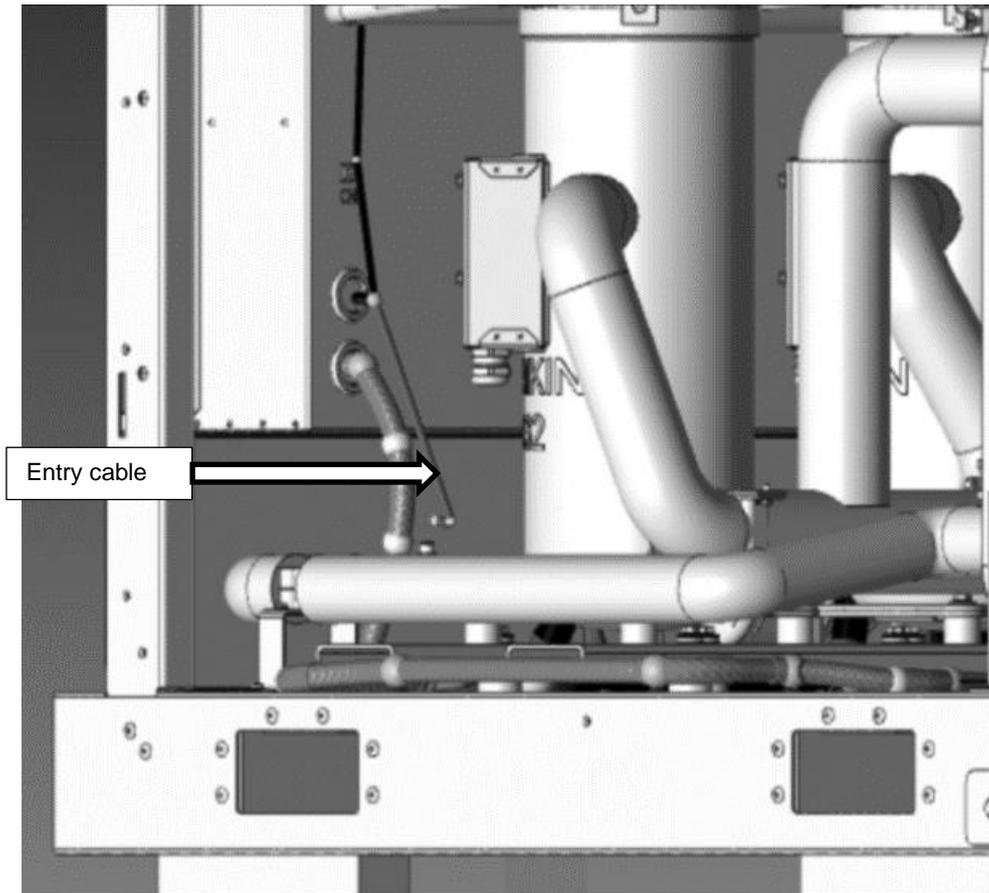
Electrical panel entry for evaporator and condenser shut off valve actuator cables
